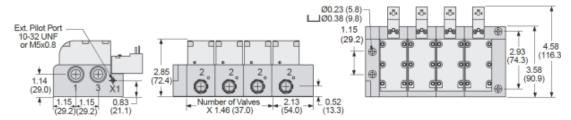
10500-3520-MP32 & 10500-3520-MP34 3520 C multiplexer valve accessories - dimensions in inches [mm]
